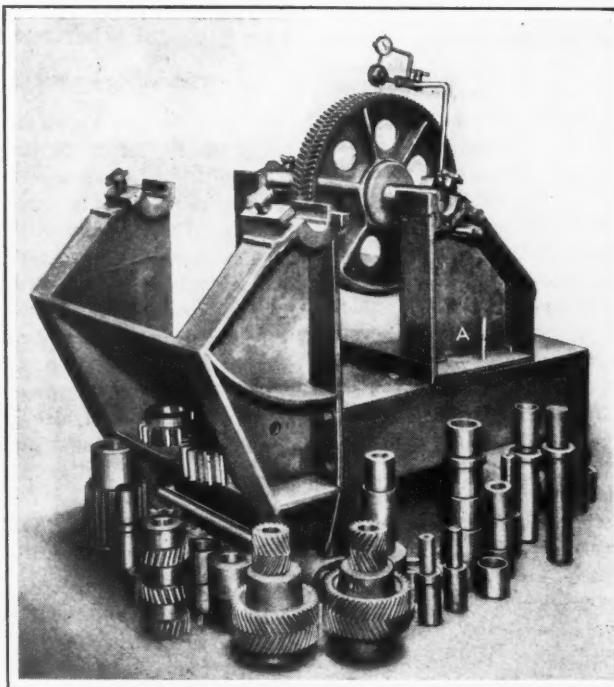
Fixture used in checking the Accuracy of Gears used in the Main Drive of Planers
